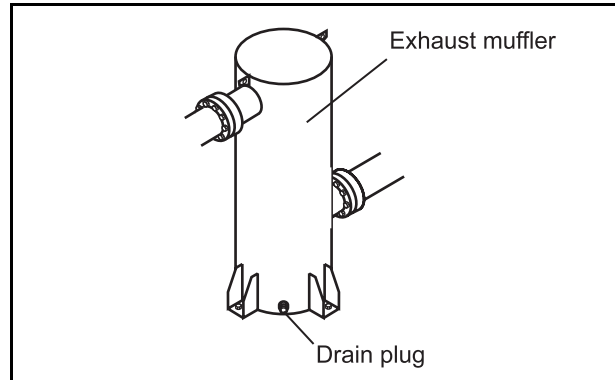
Inspection and raining water of exhaust pipes and exhaust muffler
